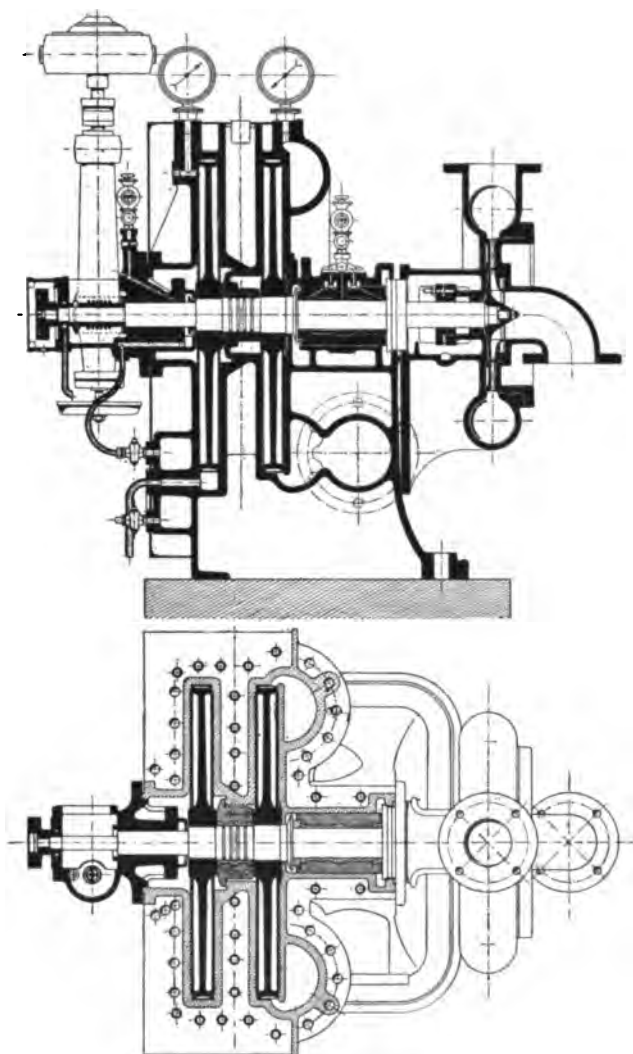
Sections through 50 Horse-power 'Union' Steam Turbine.
